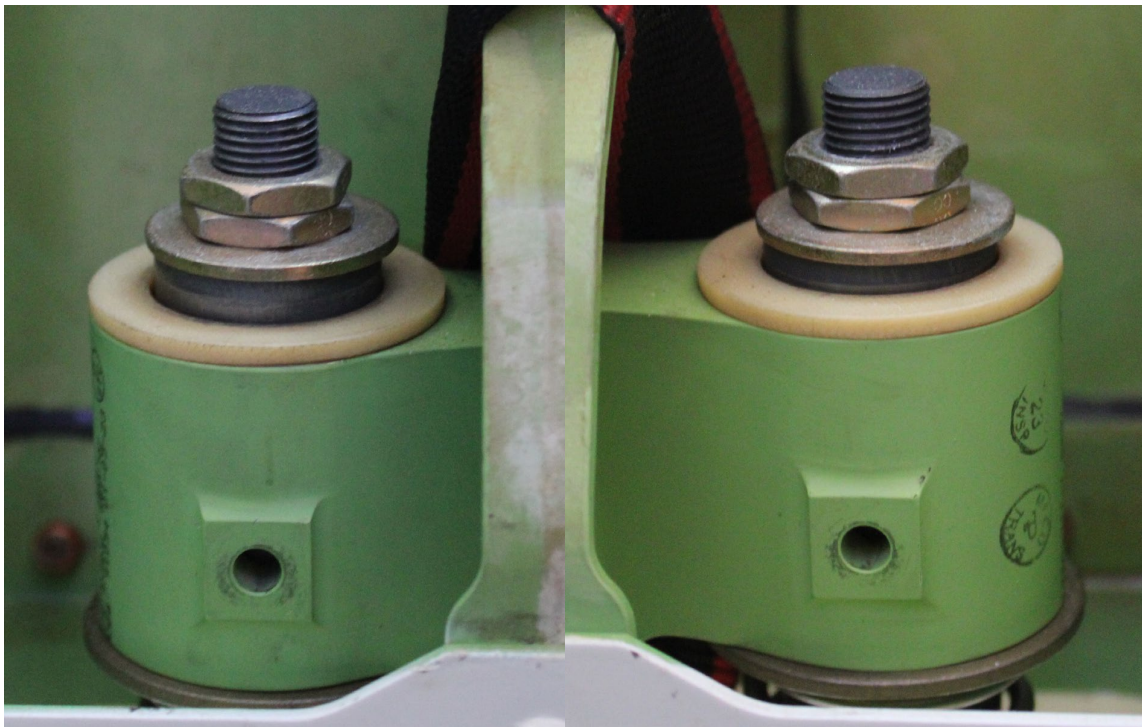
Right MED plug forward (left) and aft (right) lower hinge guide fitting inboard holes after removal of the vertical movement arrestor bolts (NTSB Photos).
